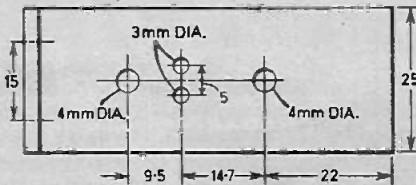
(left). Details of the heat sink for mounting CSR1. Use at least 1mm thick aluminium.
